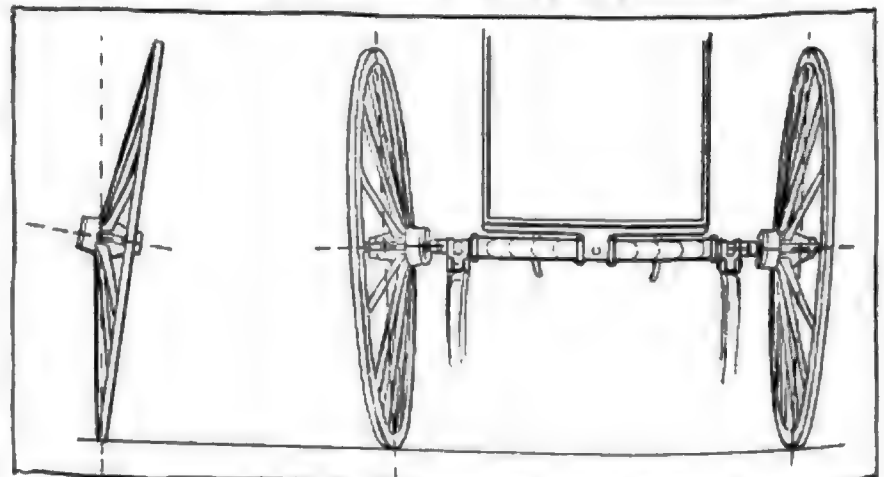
CARRIAGE WHEELS WITH DISH, CAMBER AND GATHER
